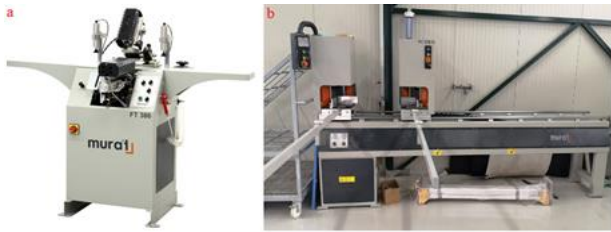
Murat FT 386 machine – a and Murat KC 258 machine - b
